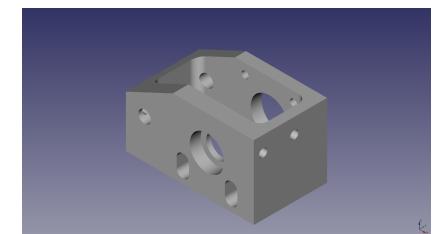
Begonia 3D Printed Lower Z Right Render
